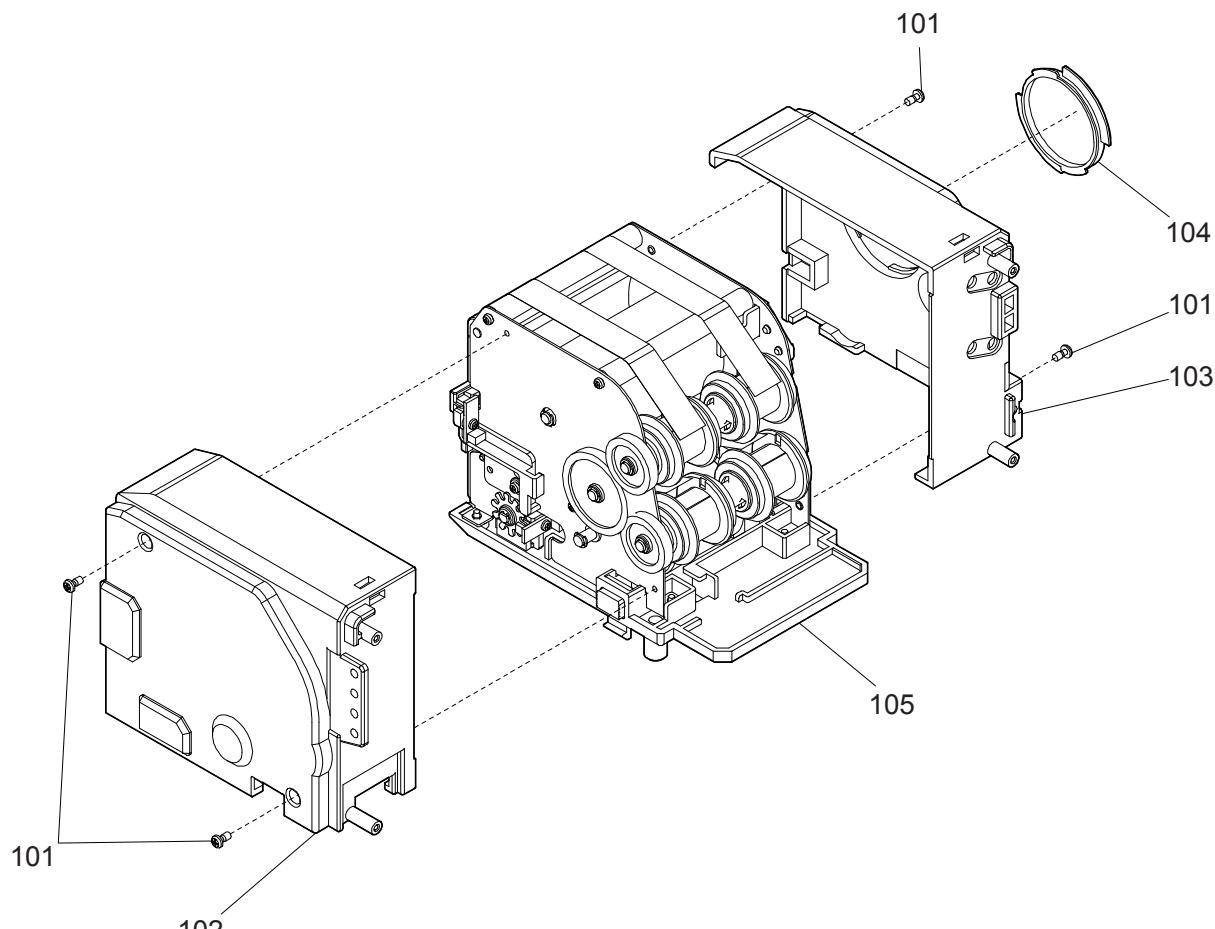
Entire VEGA-RC Exploded View (Part 1)
